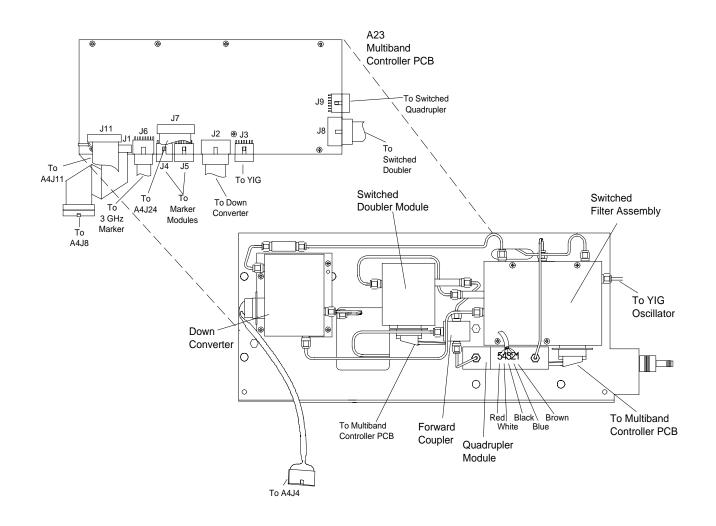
Models 54177A RF Deck Parts Location (Internal Side Detail)
